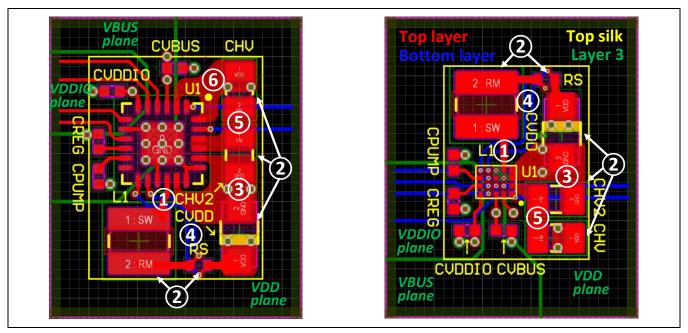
UPI configuration PCB layout examples for QFN 24L 4.0mm  $\times$  4.0mm (left) and typical configuration for WLCSP 20B 2.1mm  $\times$  1.7mm (right)
